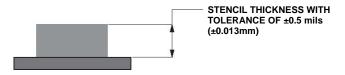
B. CROSS-SECTION (AA FROM <u>Figure 8A</u>) OF SOLDER PASTE DEPOSIT
